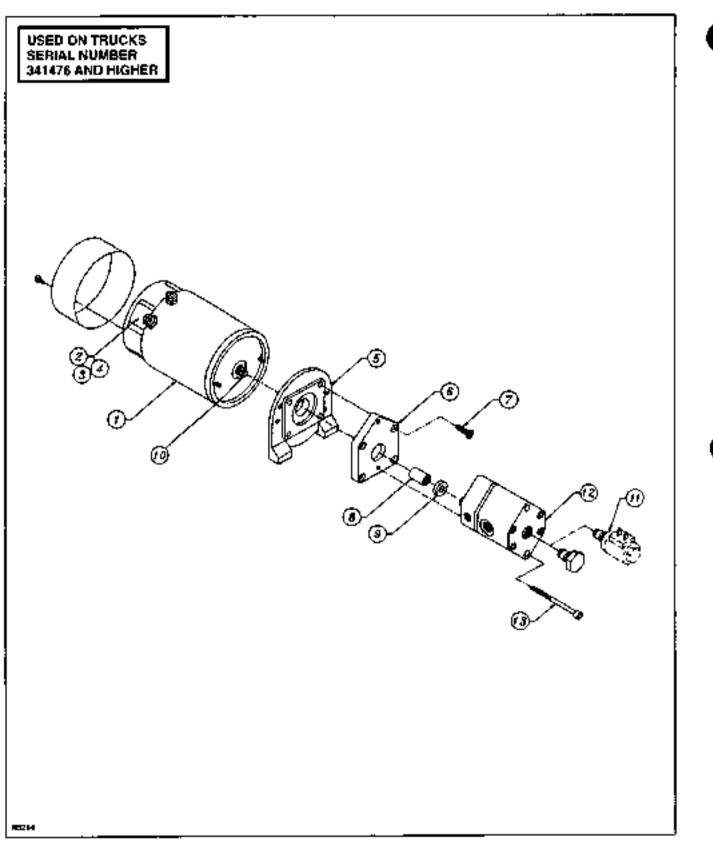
Hydraulic Pump and Motor Assembly 016936
